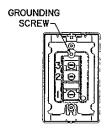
Drawing of back view of thermostat showing terminal location and identifications.
